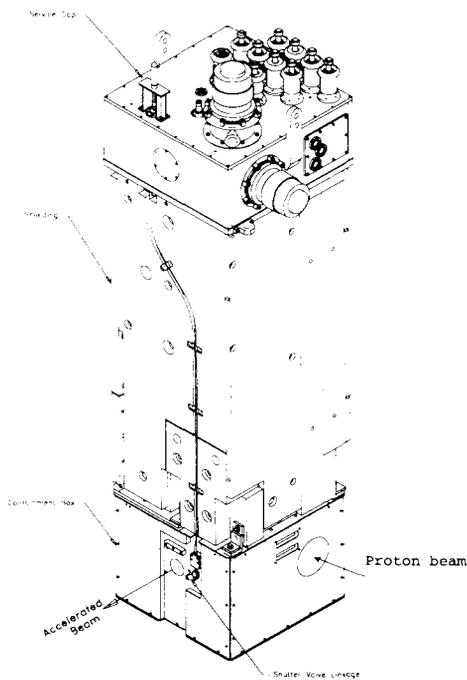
Three dimensional view of the target module showing the different aspect of the shielding plug concept.
